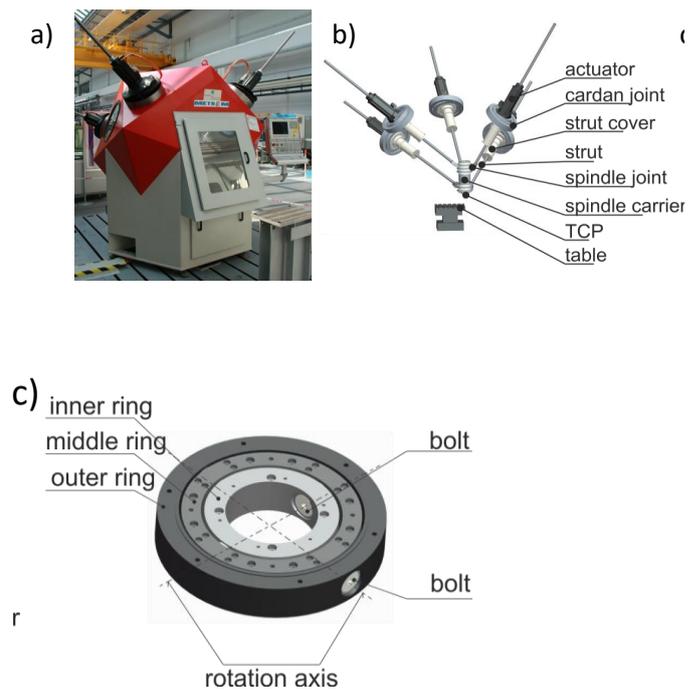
Parallel kinematic machine (a) tool with kinematic model of the spindle and the struts (b), cardan joint element (c)
